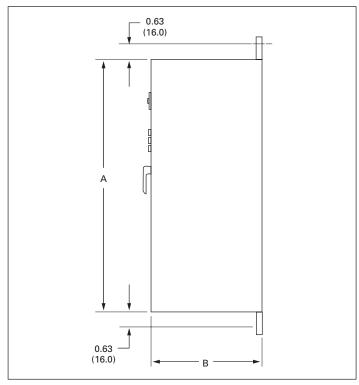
SIDE VIEW OF ENCLOSURE J
